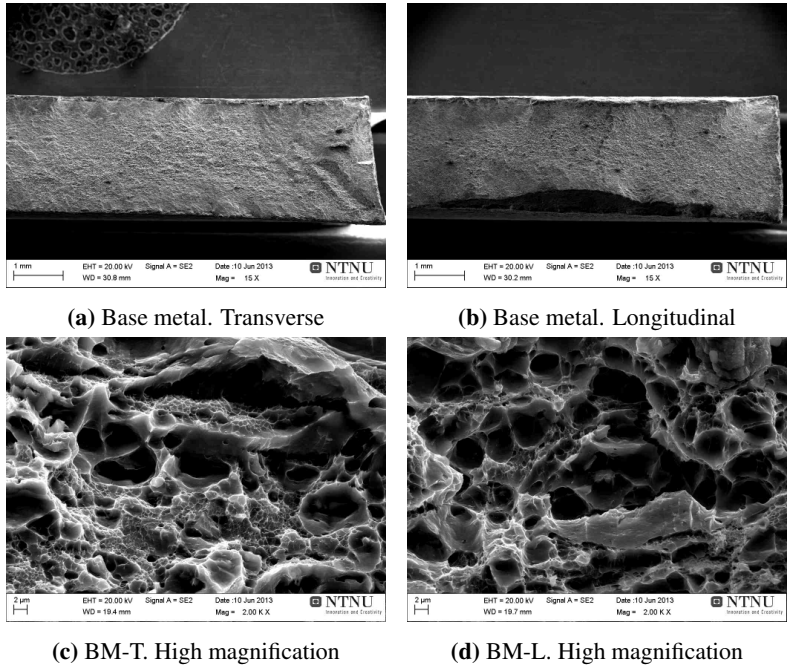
Fracture surfaces of the BM tensile specimens representing the transverse and the longitudinal direction.
